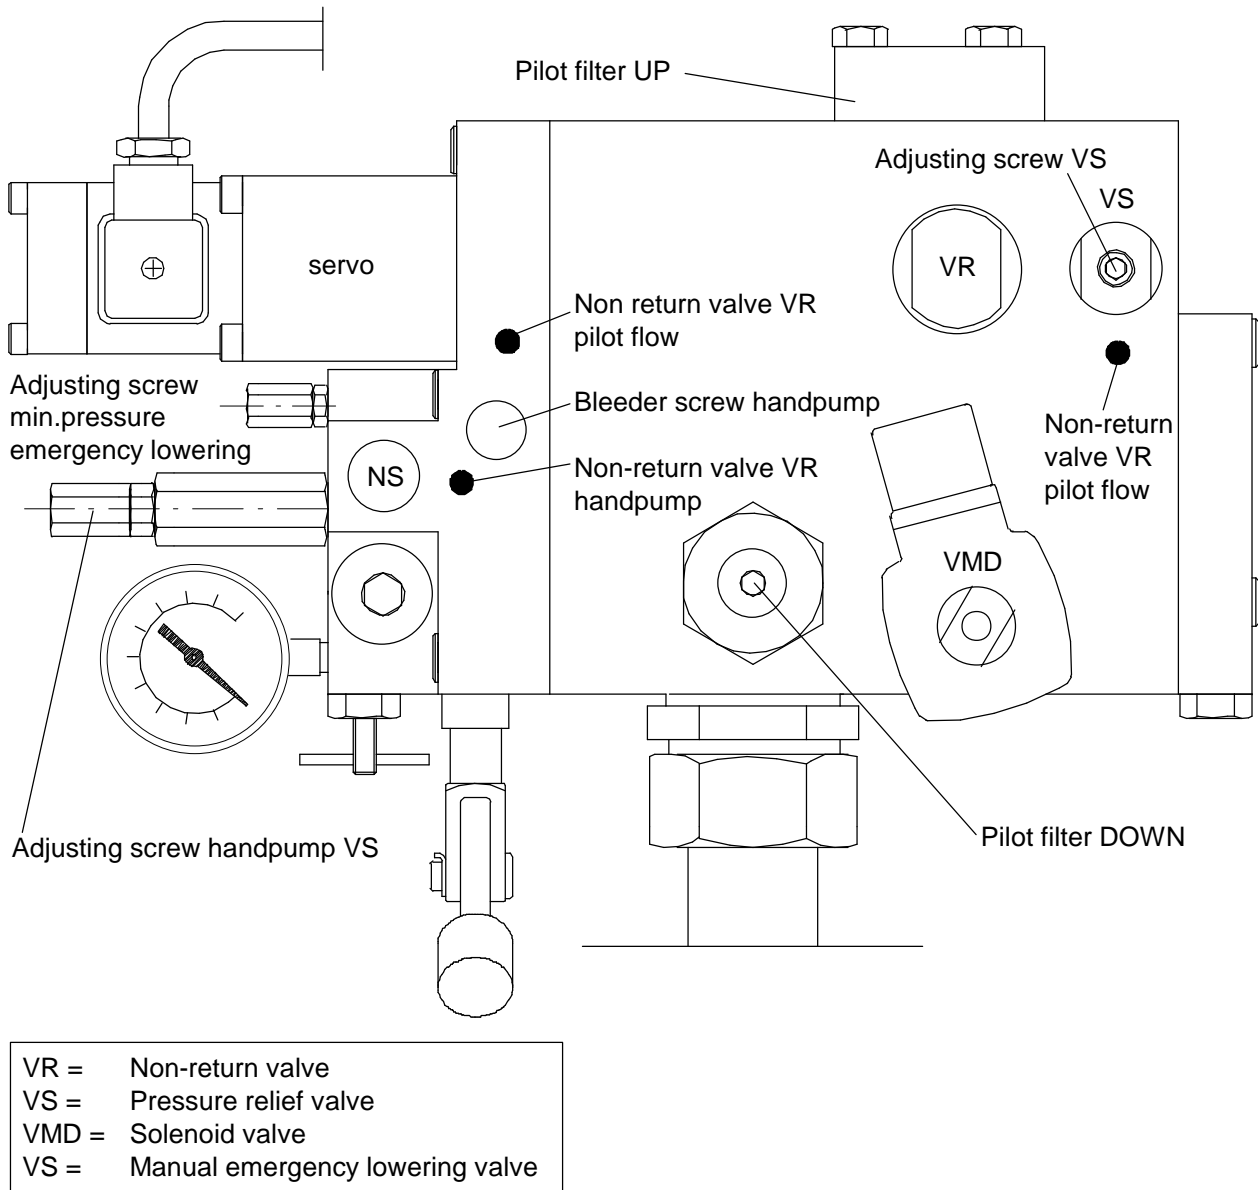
Valve system Dynahyd-S1 incl. adjustment screws
